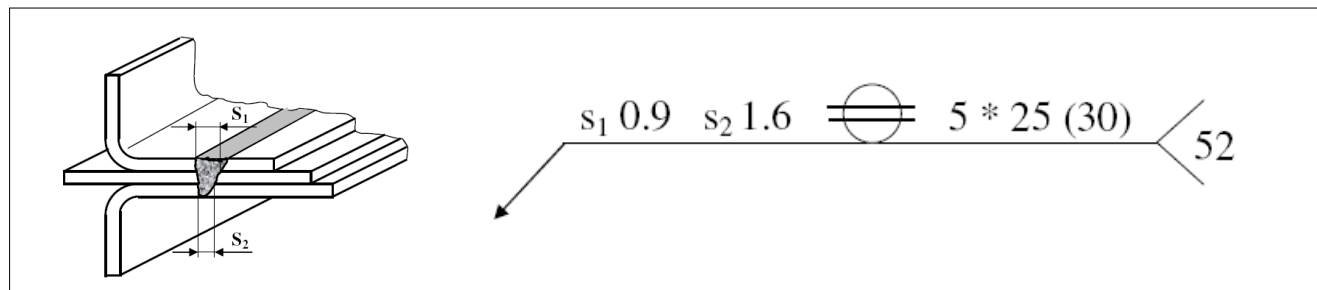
Identification of 2-Gauge Overlap Joint, Seam Weld at Edge
